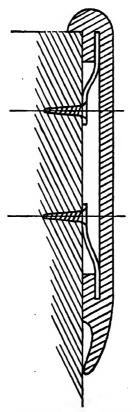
Cross section of a cold-cabinet collar that is held in position by metal strips.
